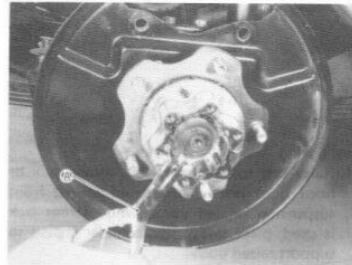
① Circlip remover (09900-06107)
